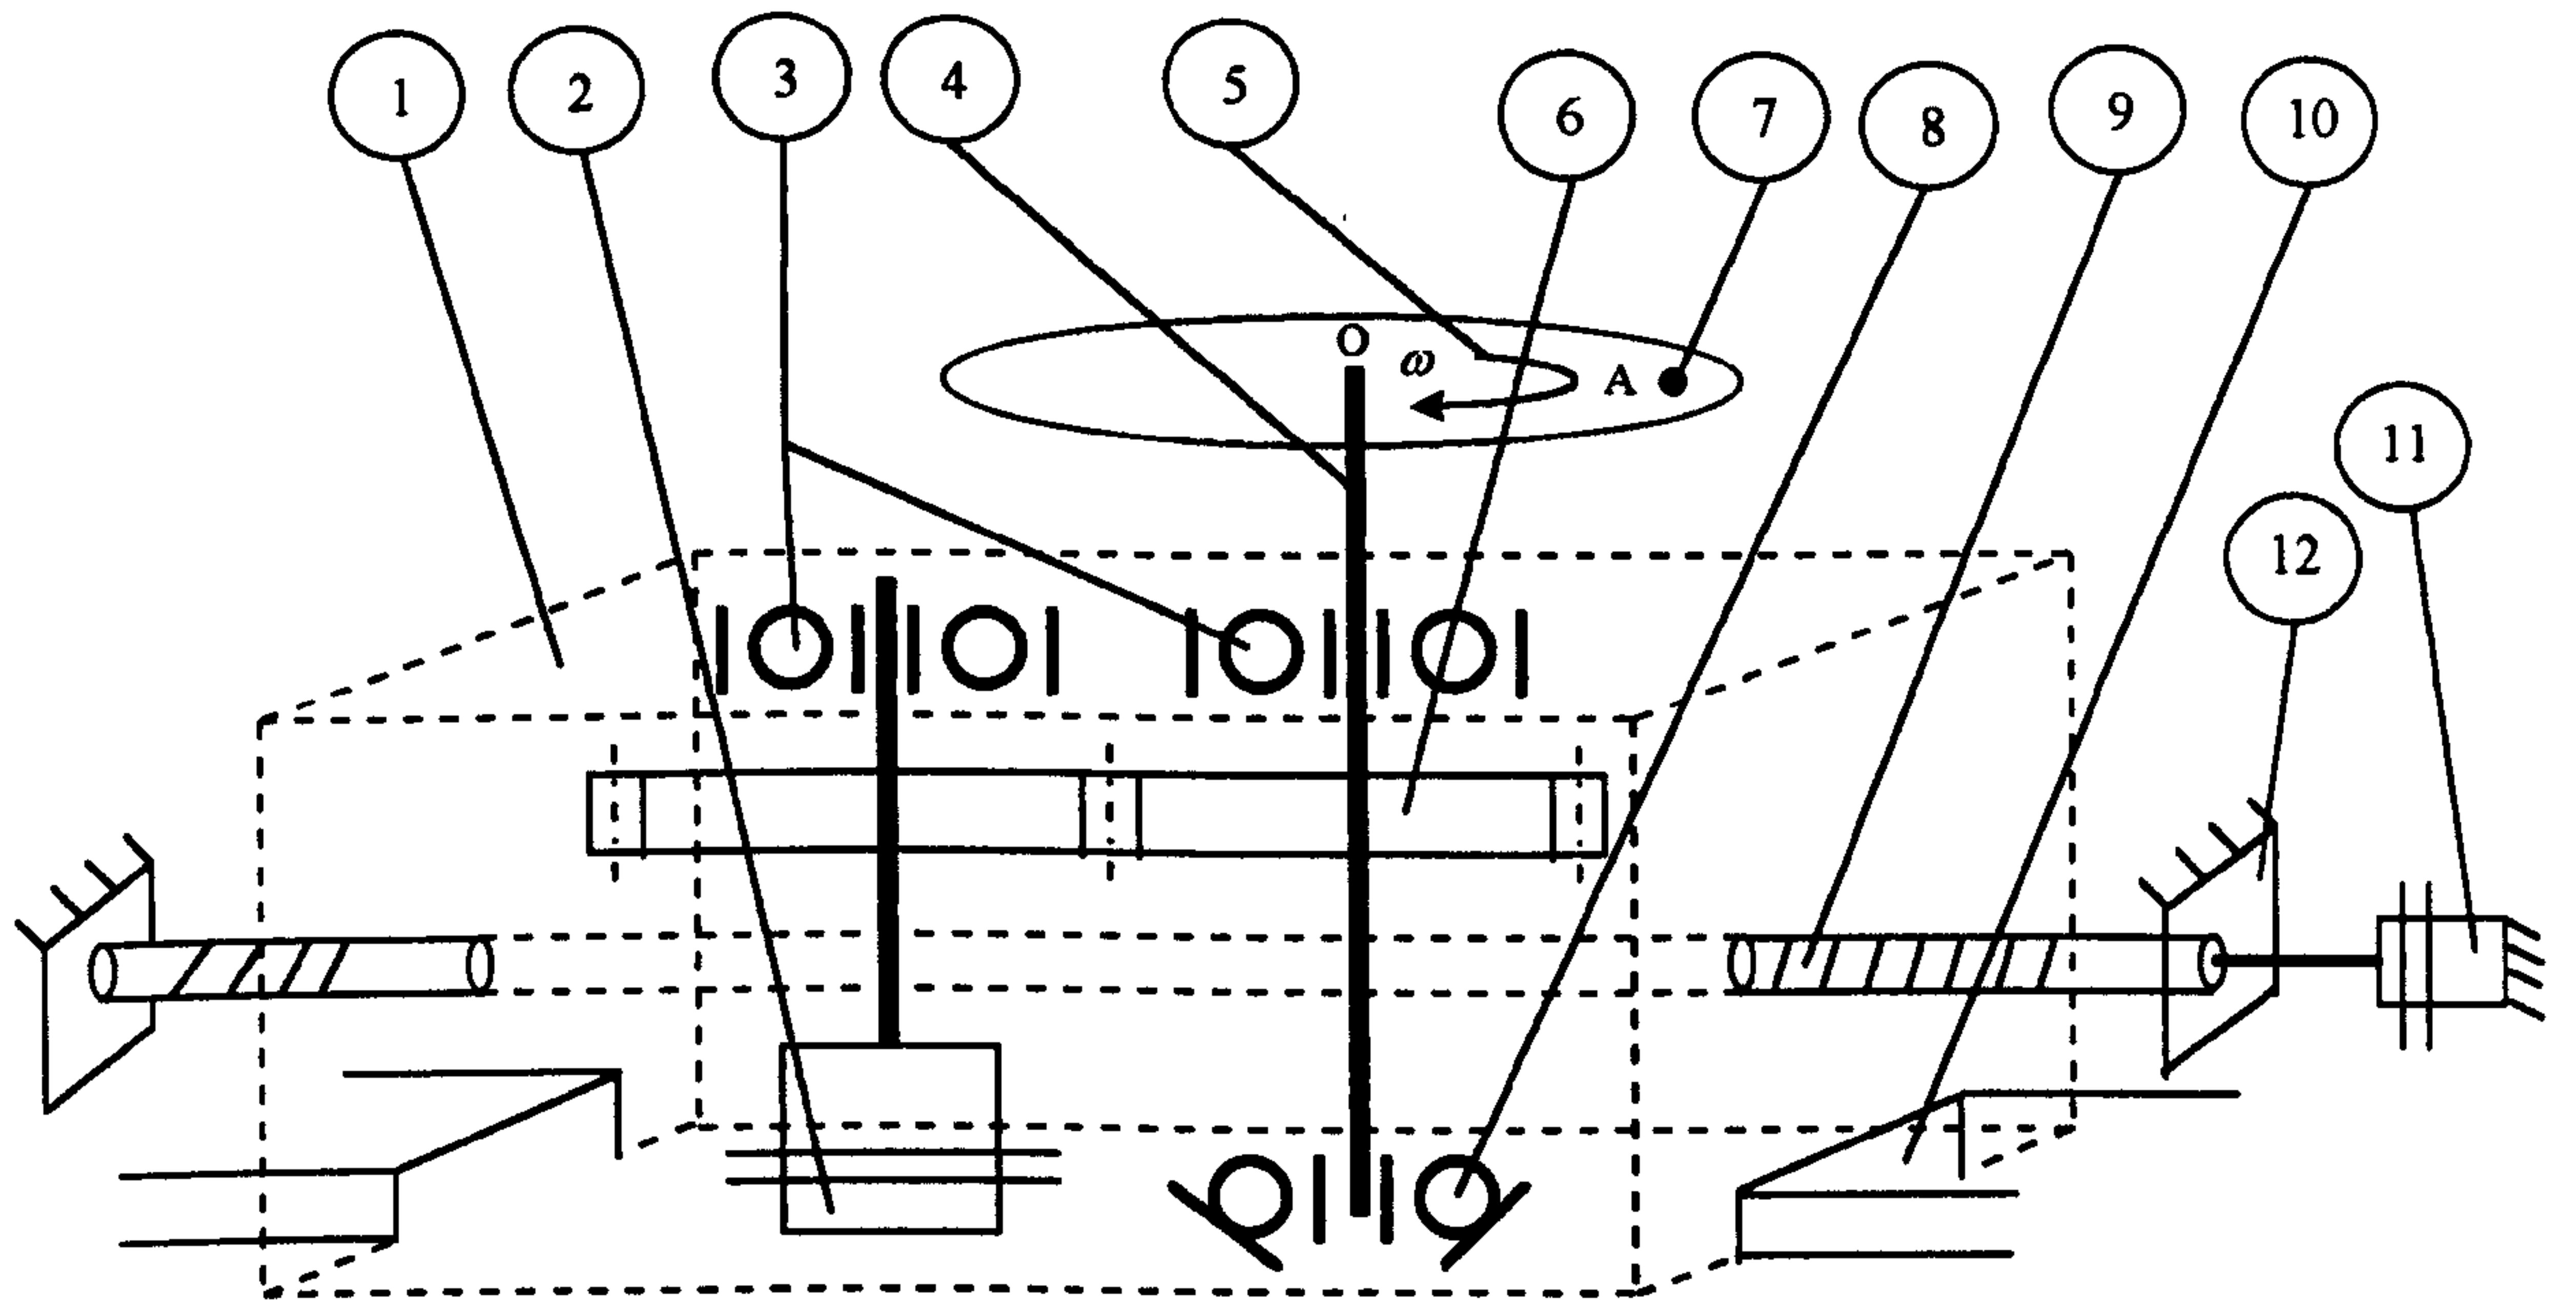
The design of X-Y table. The laser beam and the gas nozzle are fixed. The cutting profiles can be chosen as linear, circular and spiral
